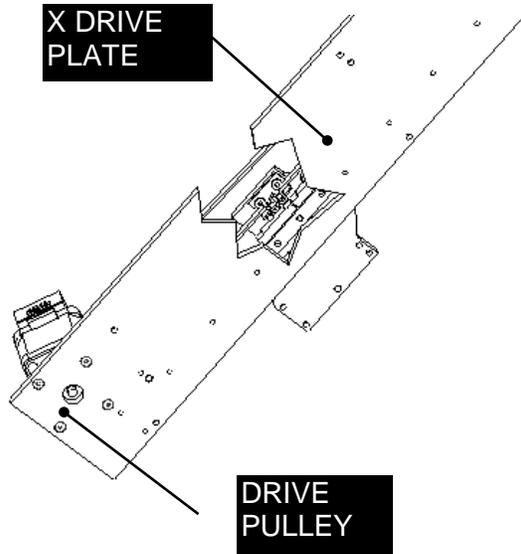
X Belt Attachment Bracket (From underneath the X drive)
